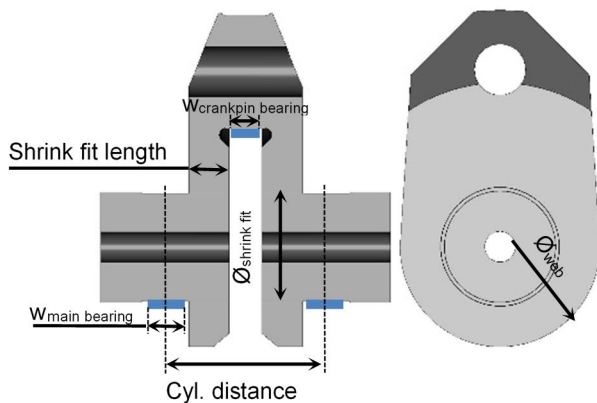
Cross-section of crankshaft throw; properties influencing the cylinder distance
